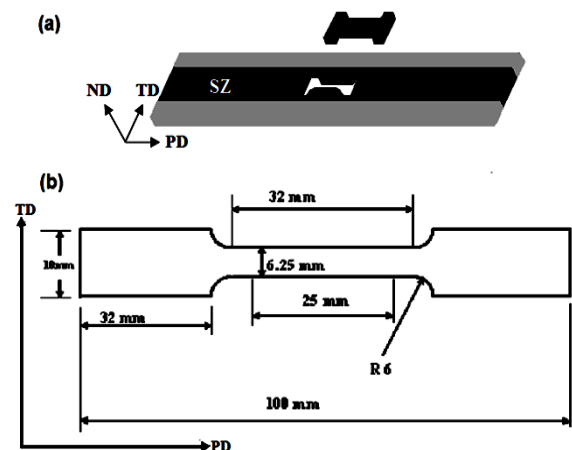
Tensile test specimen (a) Scheme of Position selection for the specimens of tensile test of FSP,(b) Tensile test specimen dimensions in mm (6 mm thick) (ASTEM Standards Part 31).
